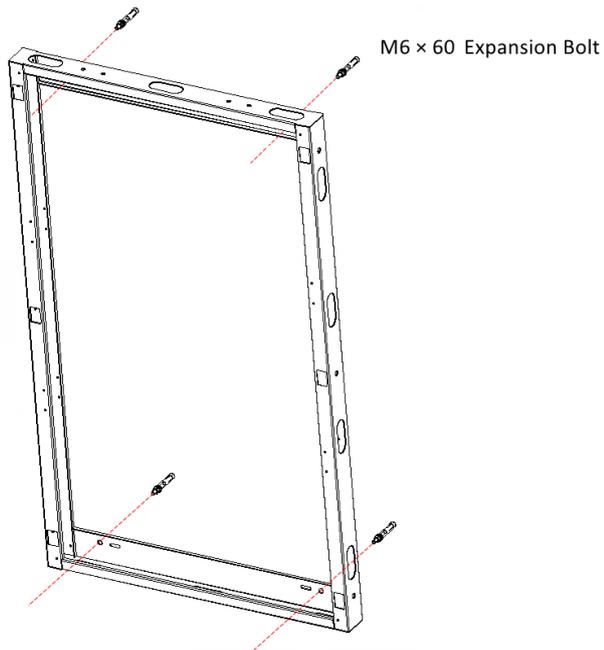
Install Wall-Mounted Rack onto the Wall
